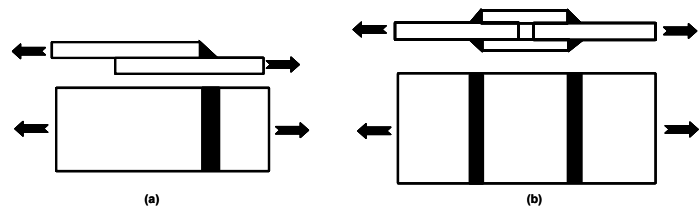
The transverse-fillet-weld-tension-shear specimens. Block arrows indicate loading direction.
